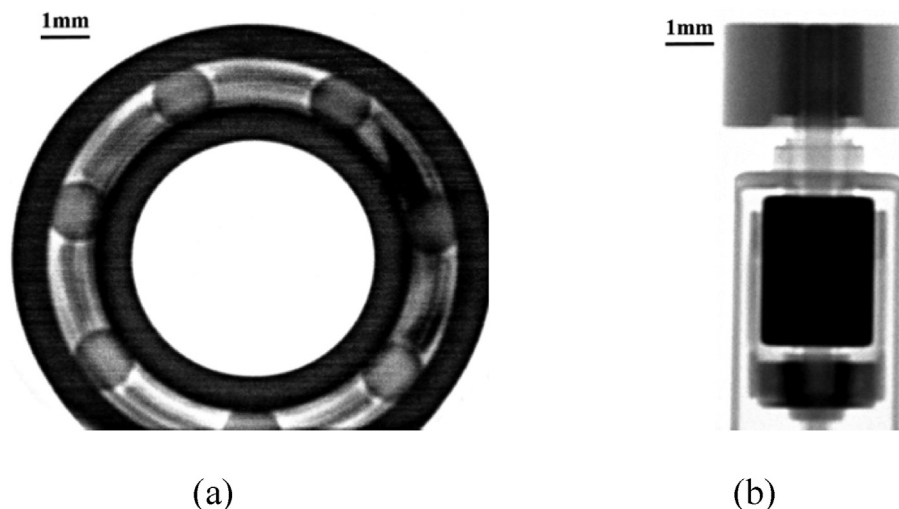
Imaging photographs of the small bearing (a) and mini motor (b).
